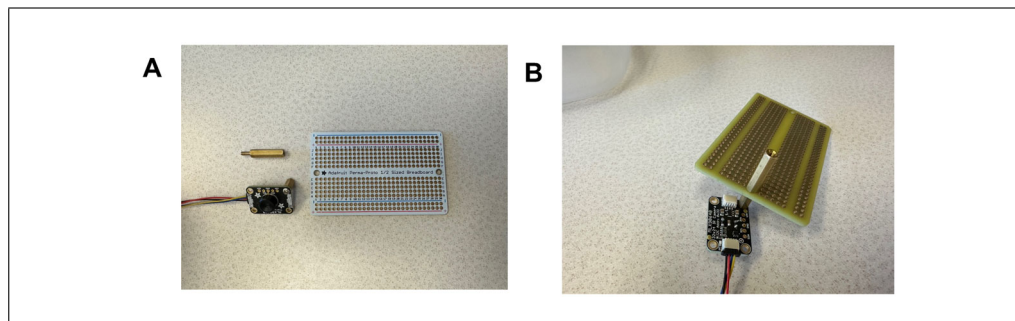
PCB assembly. (A) Thermal camera, breadboard, and brass standoff. (B) Adafruit MLX90640 thermal camera mounted onto the Adafruit Perma-Proto Half-sized Breadboard PCB using a brass standoff.
